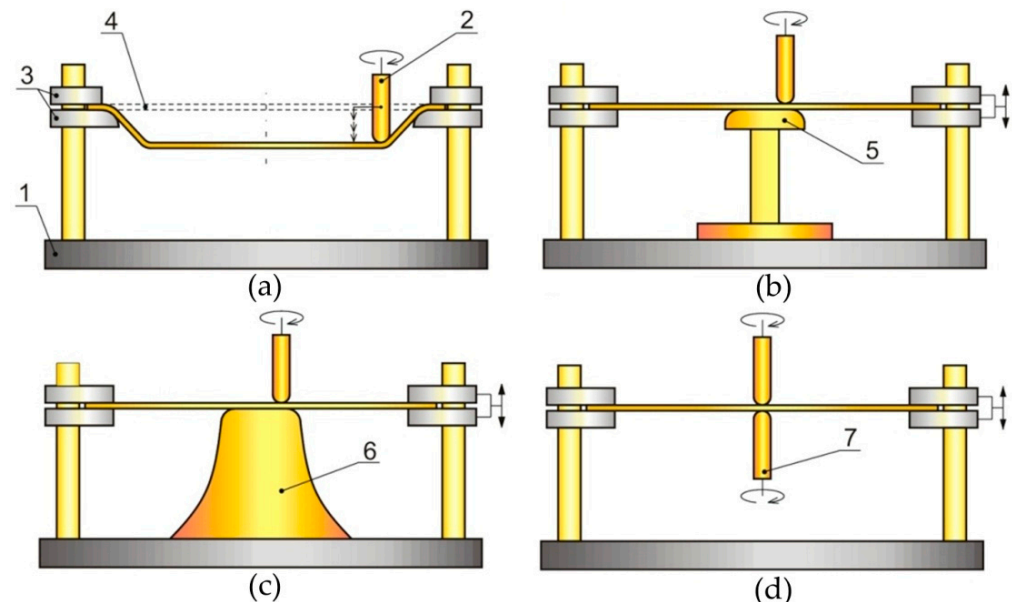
Processes of incremental forming: (a) SPIF, (b) TPIF with a partial die, (c) TPIF with a full die, (d) TPIF with counter tool: 1—frame, 2—forming tool, 3—fixture, 4—workpiece (starting position), 5—partial die, 6—full die, 7—counter tool.
